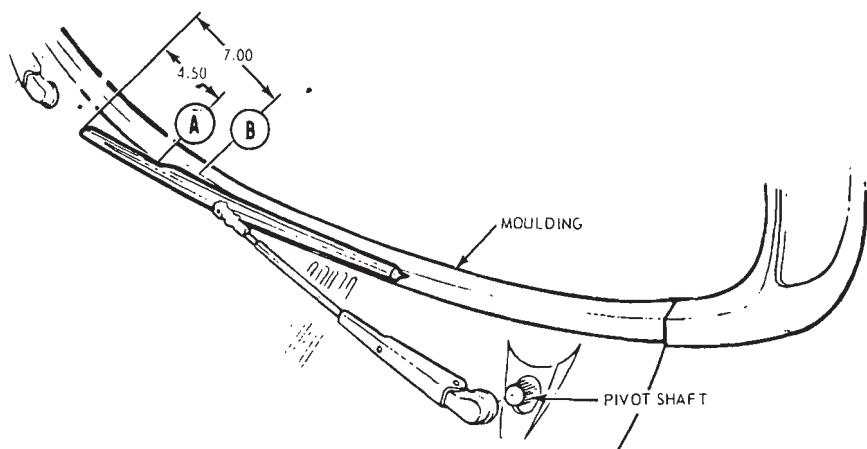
Adjustment of Windshield Wiper Arm and Blade Assembly
